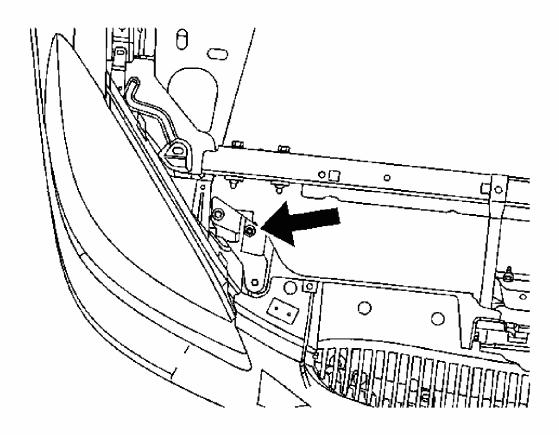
Adjusting Headlamp Alignment Courtesy of GENERAL MOTORS CORP.
